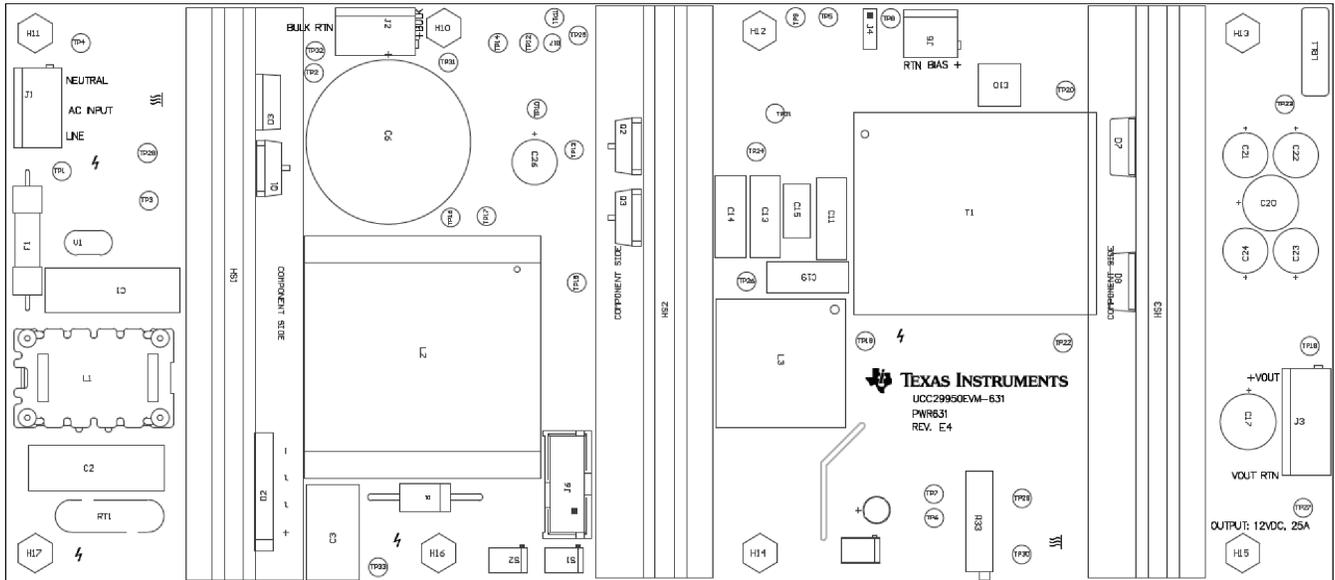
UCC29950EVM-631 Top Layer Assembly Drawing (top view)
